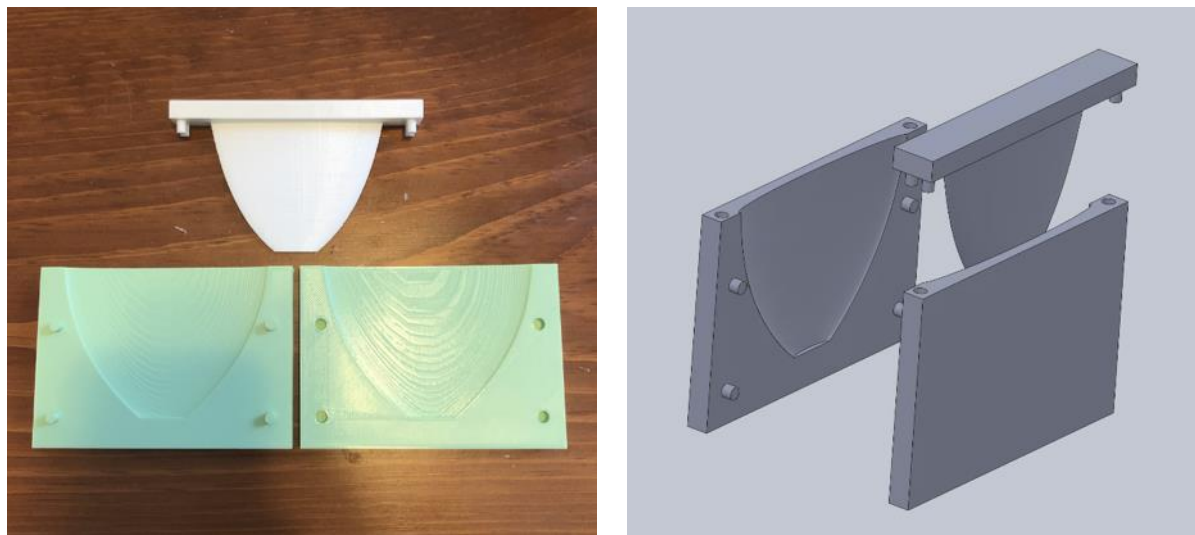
Silicone Mold 3D Printed Model and CAD
